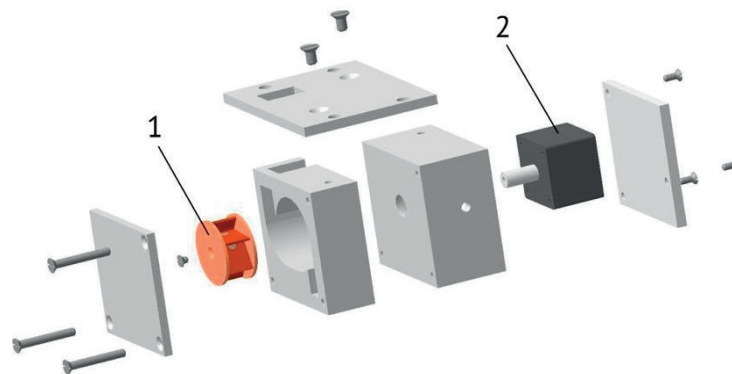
Sand supply dispenser: 1 - impeller; 2 - stepper motor
